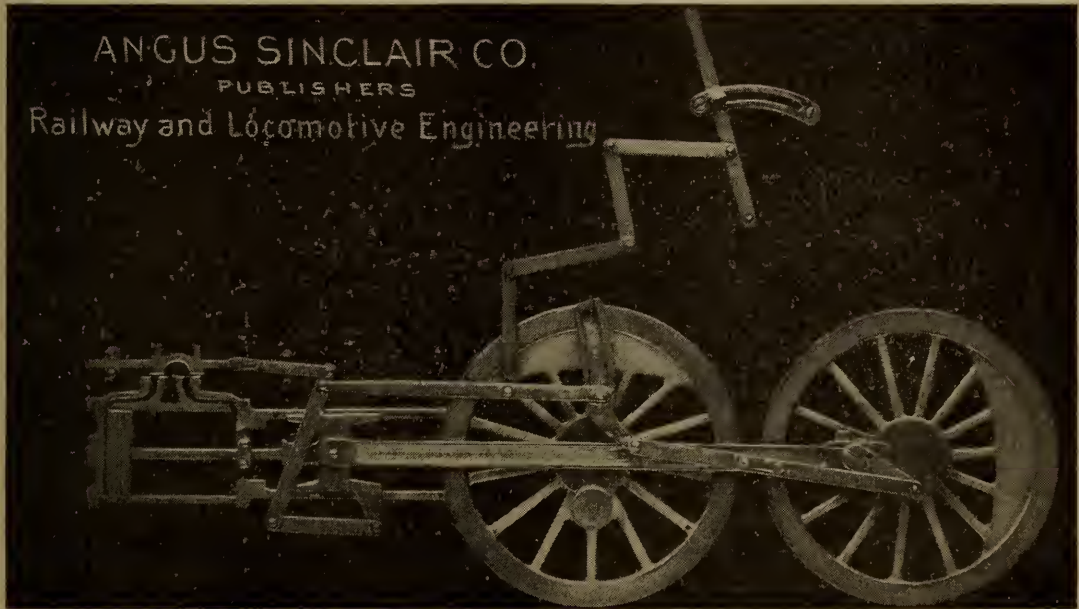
FORWARD GEAR, LINK-BLOCK AT BOTTOM OF LINK.
